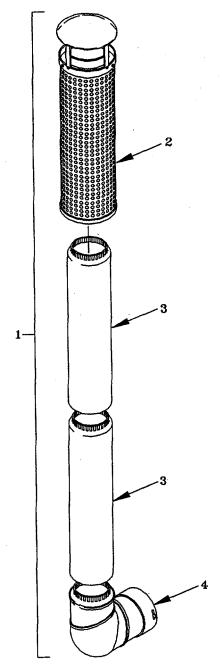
SMOKESTACK AND GUARD ASSEMBLY (MODEL M80)
